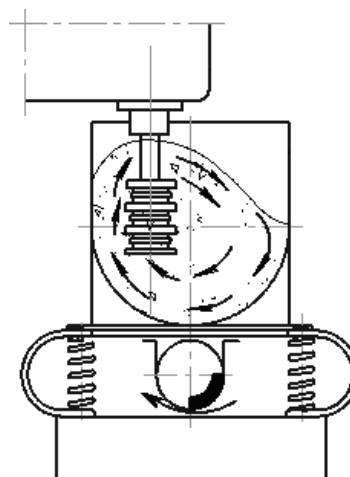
Scheme of the process of spindle vibration abrasive processing: 1 - spindle of the machine; 2 - working chamber (bunker); 3 - vibration installation; 4 - the workpiece
